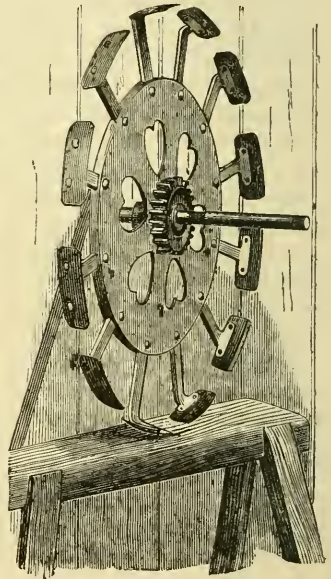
Wheel and Blade of Smith's Turnip-thinner, No. 735.
